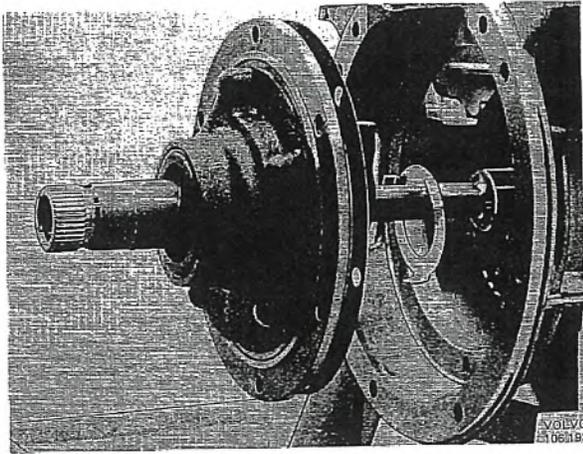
Installation sequence, front pump assembly thrust washer and gasket
